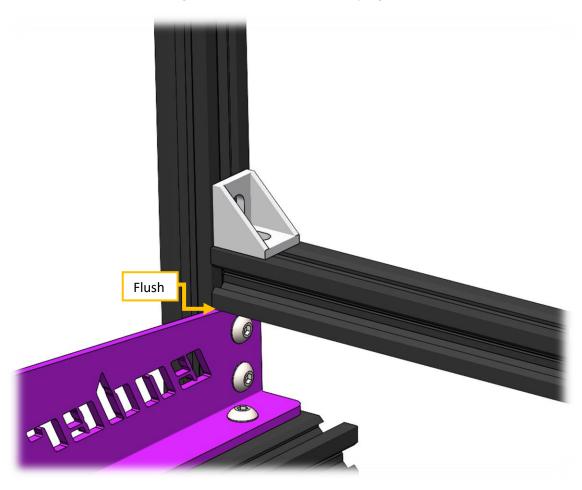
Aluminum extrusion must be in touch with bottom bracket.
